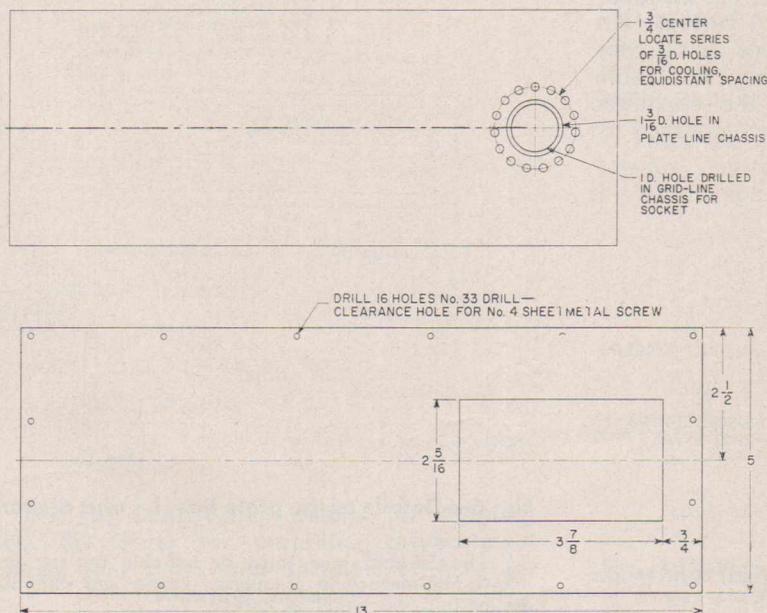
(a) Details of vent and socket holes; (b) Details of top cover for plate-line chassis.
